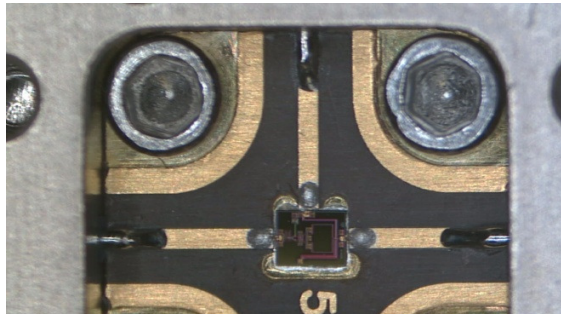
Mixer MMIC mounted in a connectorized fixture with gold wire bonding. Chip size is 1.4 mm x 1.1 mm. Left port is RF, Top port is LO, Right port is IF.
